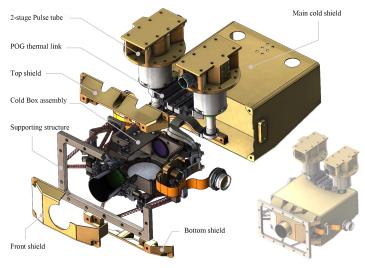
Exploded view of the Optical Bench Assembly and assembled view in miniature
